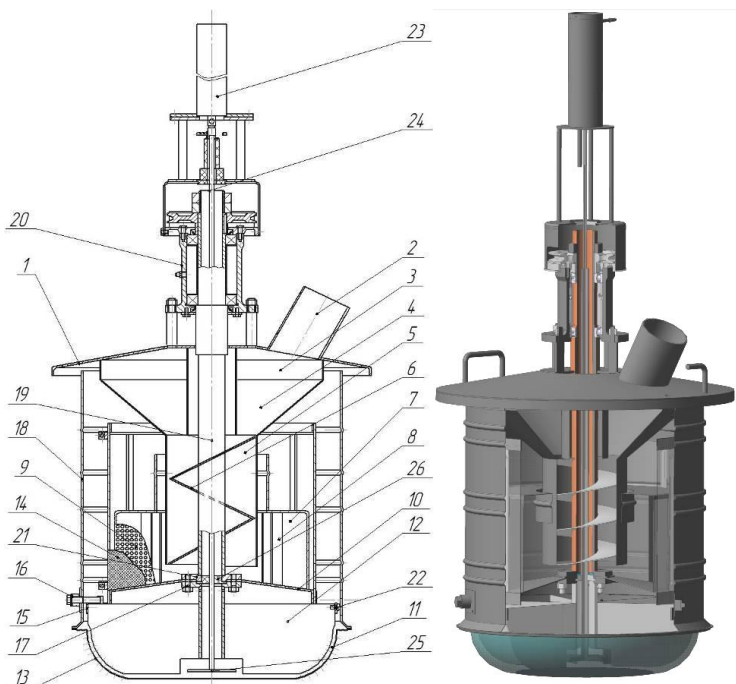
The improved rotating vibration granulator of solutions (melts): 1 - housing; 2 - pipe for introducing the solution (melt); 3 - ring collector; 4 - reverse cone; 5 - annular channel; 6 - auger; 7 - distributor of the solution (melt); 8 - directing blades; 9 - perforated cylinder; 10 - directing cone for the solution (melt); 11 - perforated bottom (basket); 12 - pressure blades; 13 - hole; 14 - mesh for the final melt filtration; 15 - ring; 16 - bolts; 17 - pins; 18 - cylindrical chamber; 19 - hollow shaft; 20 - bearing assembly; 21 - flange connection; 22 - bulge for centering the cylindrical chamber; 23 - vibration device; 24 - rod; 25 - disc radiant; 26 - hub.
